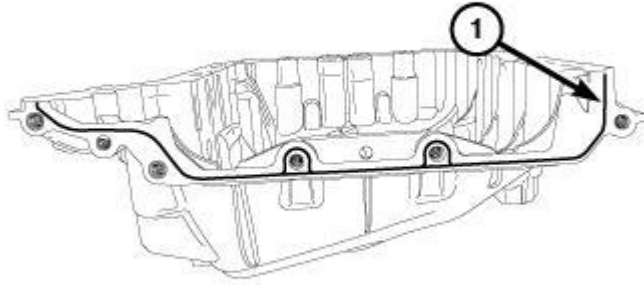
Applying Engine Sealant RTV Onto Oil Pan Mating Surface
